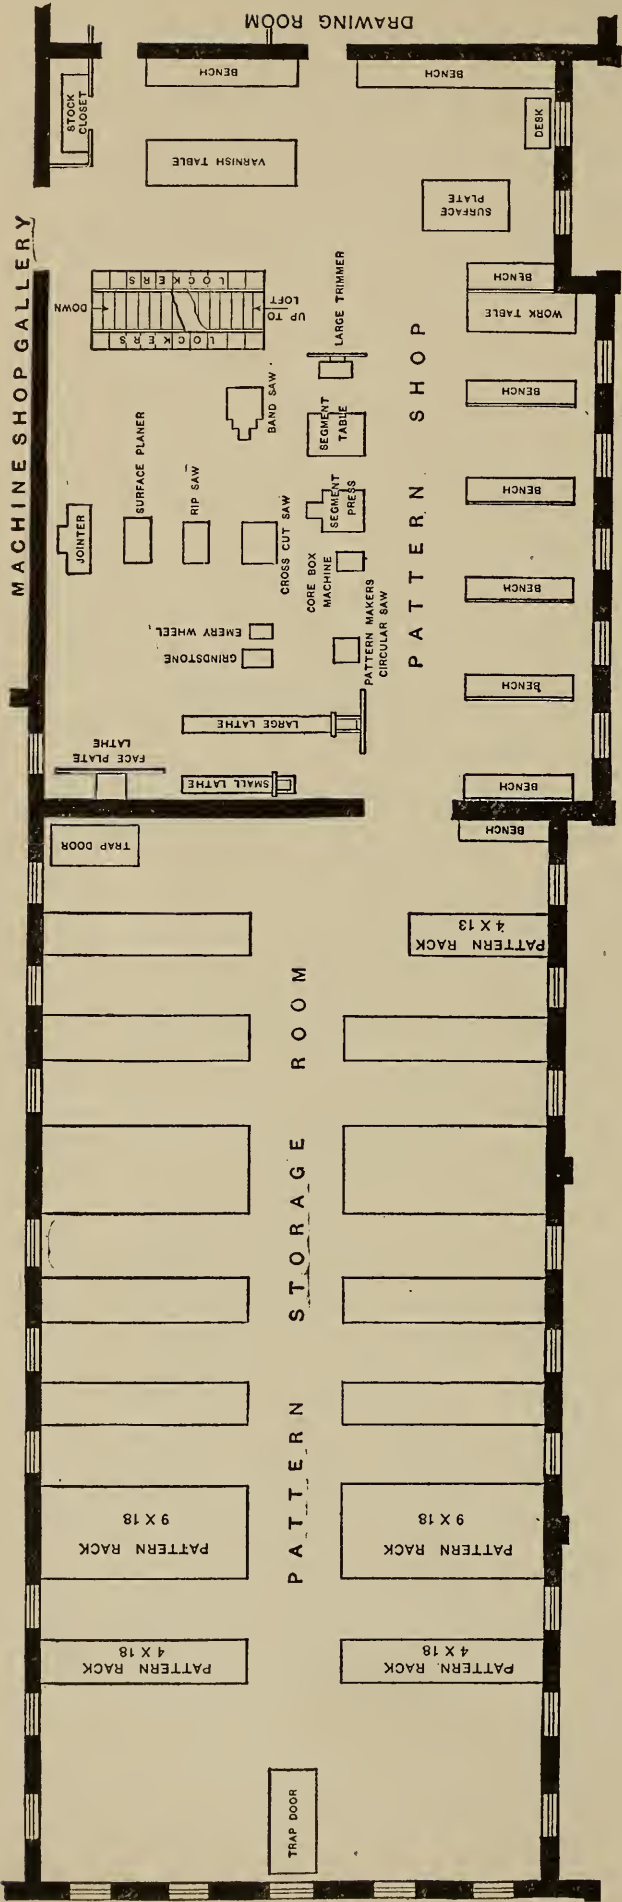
Plan of Pattern Shop and Pattern Storage Room.
